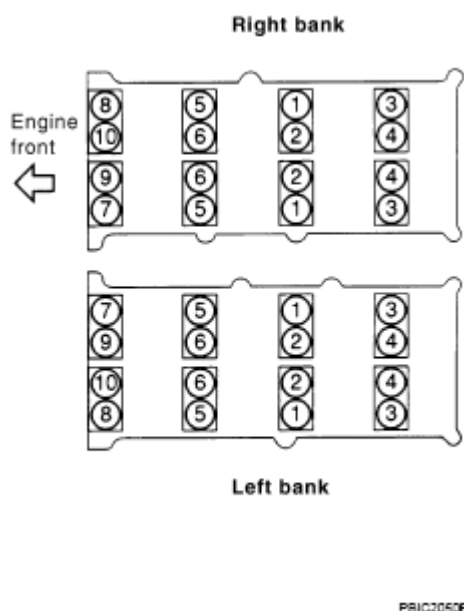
Identifying Camshaft Bracket Bolts Loosening Sequence
